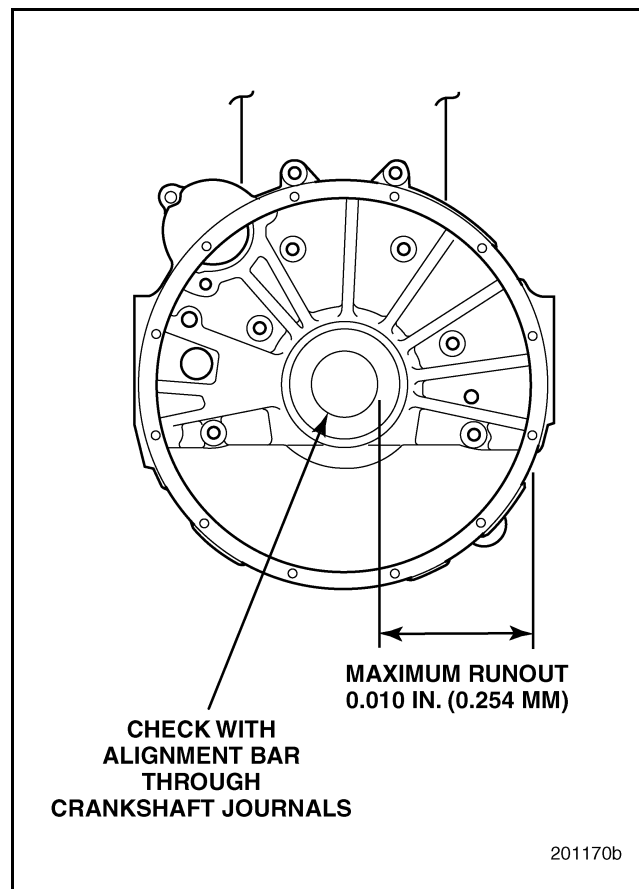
Flywheel Housing Runout Check with Alignment Bar
